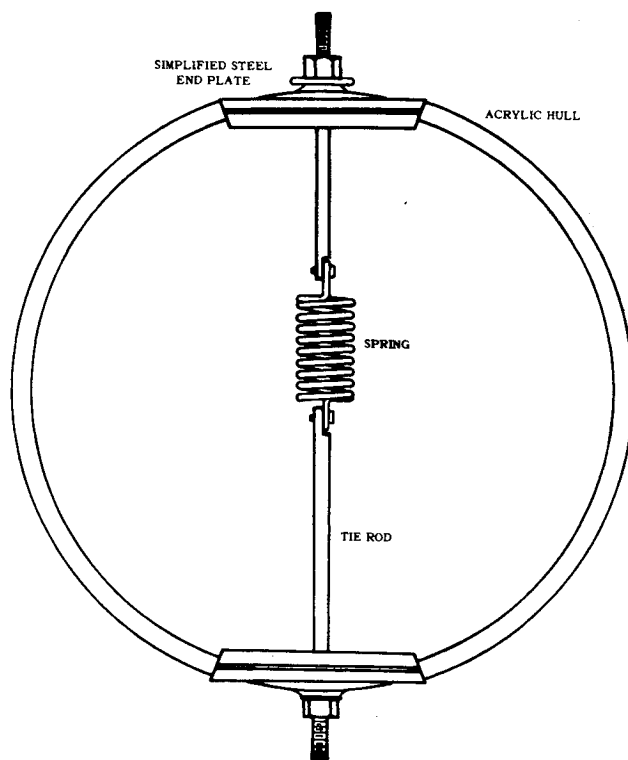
15-in.-diam acrylic hull model with simple end plates.
